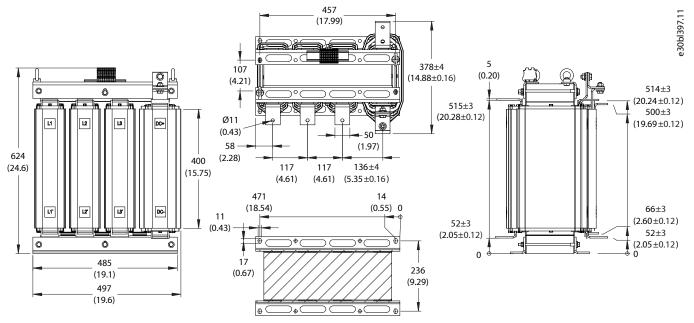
Dimensions of the Drive Side Inductor in mm (in)
